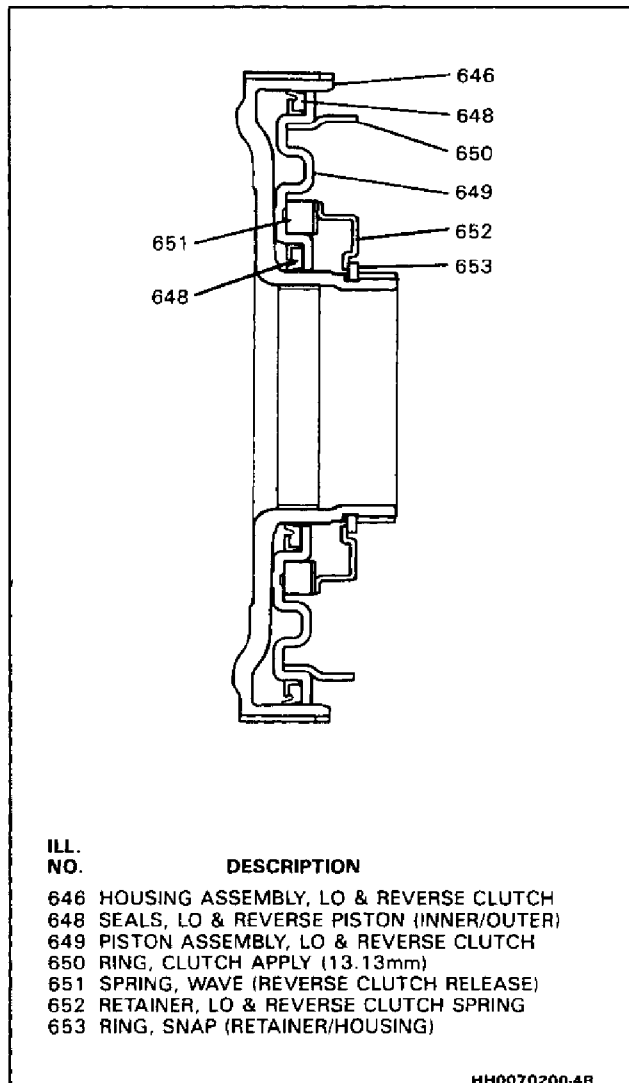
Cross Section - Lo and Reverse Clutch Housing
